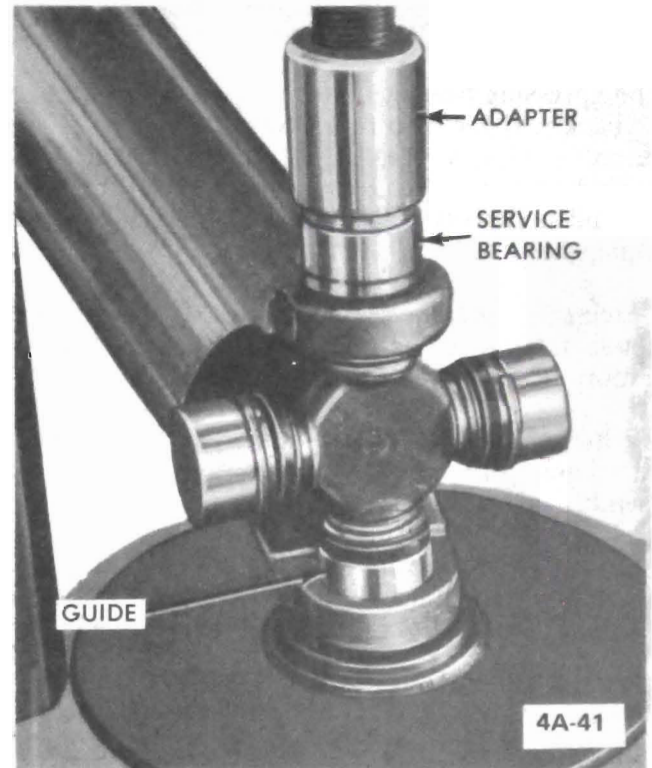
A-41 - Installing U-Joint Bearing With Guide in Place.
